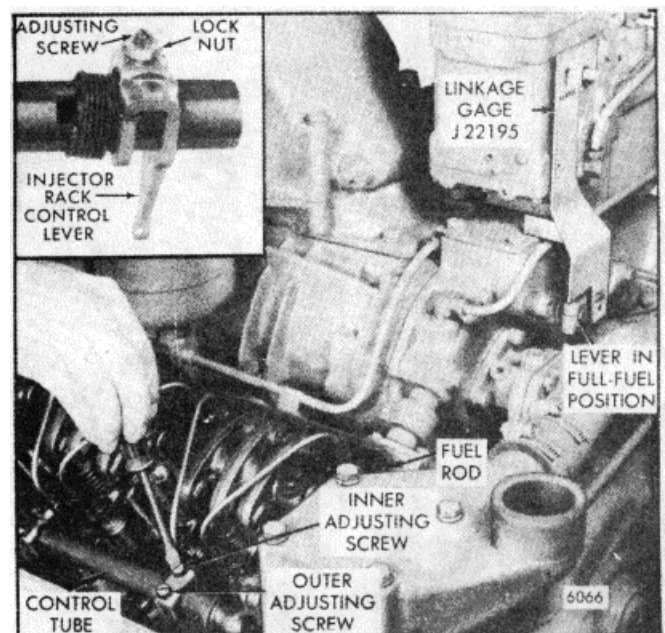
Positioning No. 1R Injector Rack Control Lever
